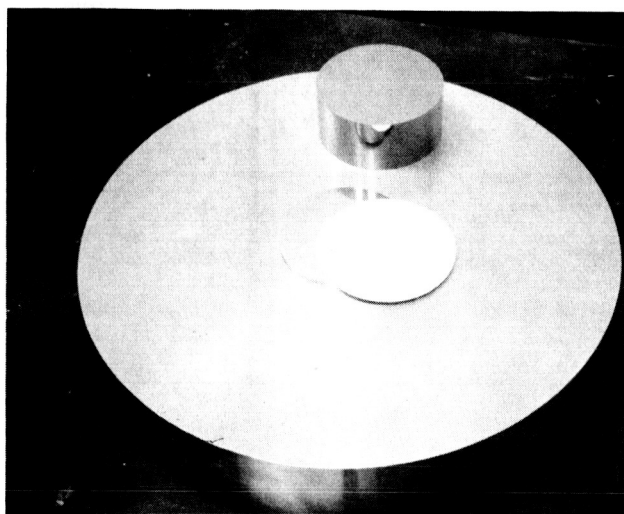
Mold and Hydraulic Press Used for Cold Pressing Inorganic Fuel Cell Membranes
